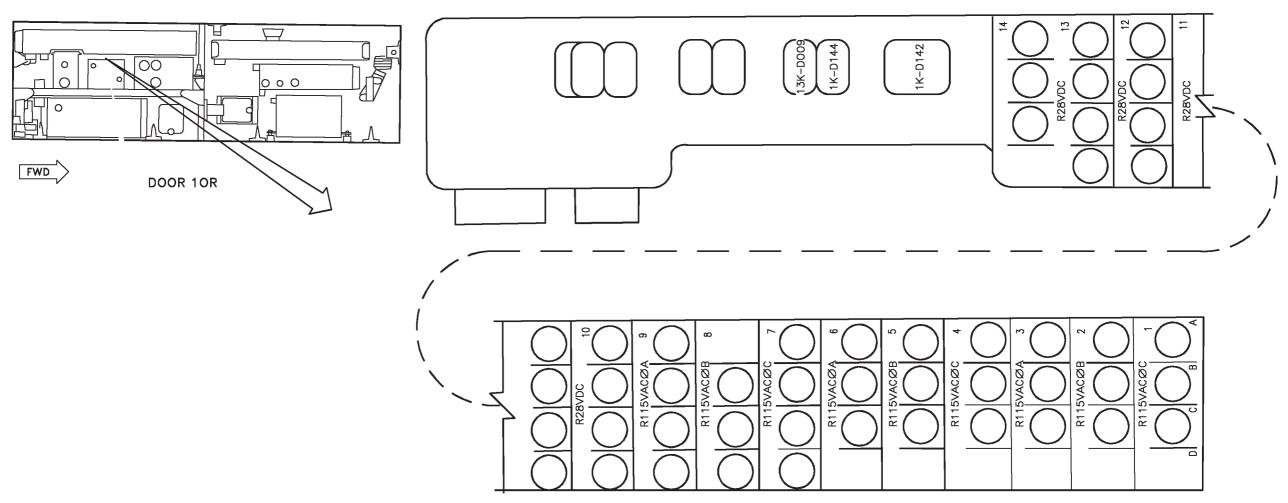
No. 4 Circuit Breaker Panel Assembly - 52A-D026-161353 THRU 161359 (Sheet 1)
